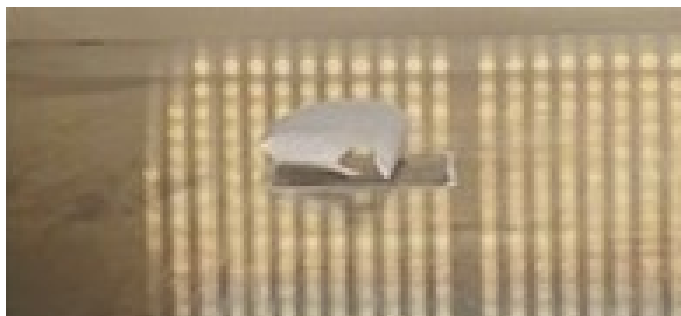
Upper pressure pad folded during the hot-pressing.
